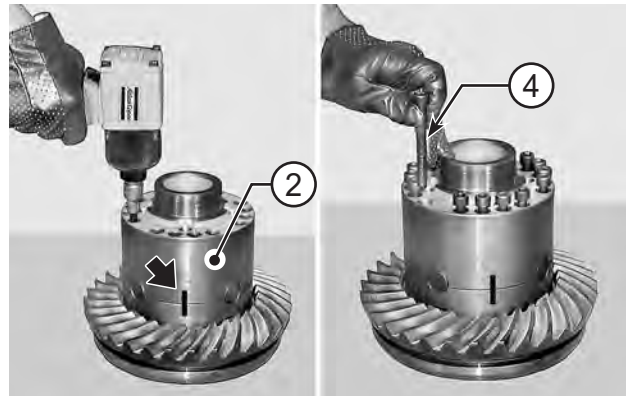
Make positional match marks on the half boxes of the differential gear (2); loosen and pull out joining screws (4).
